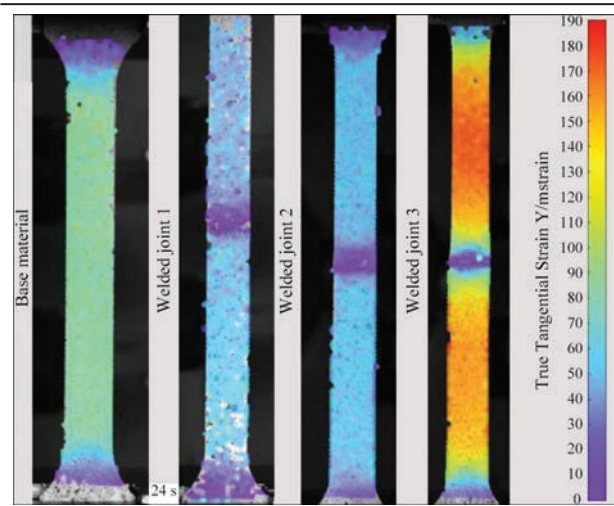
Strain fields in tensed base material and welded joint ($t=24$ [s])
